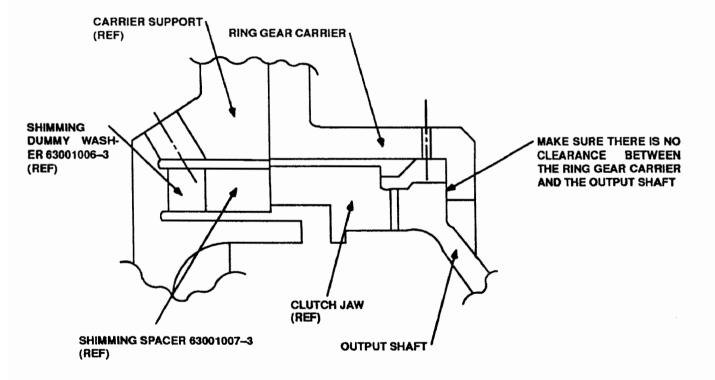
Clearance Between the Ring Gear Carrier and the Output Shaft
